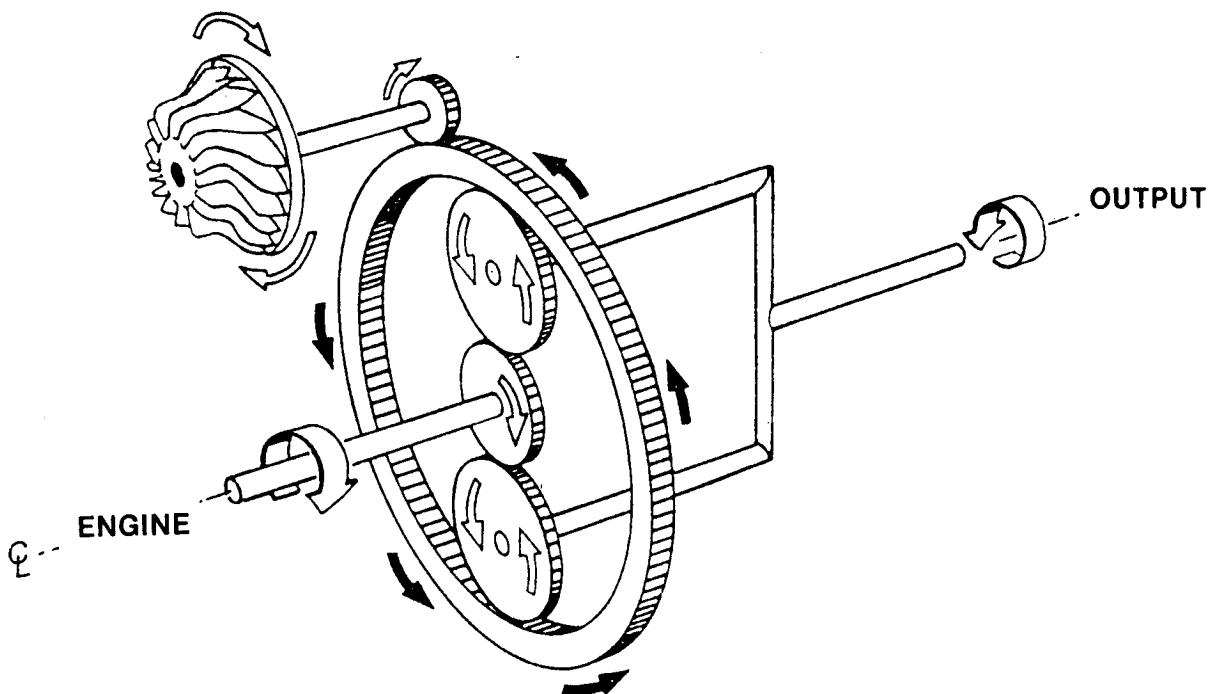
DIFFERENTIAL GEARED DRIVE
